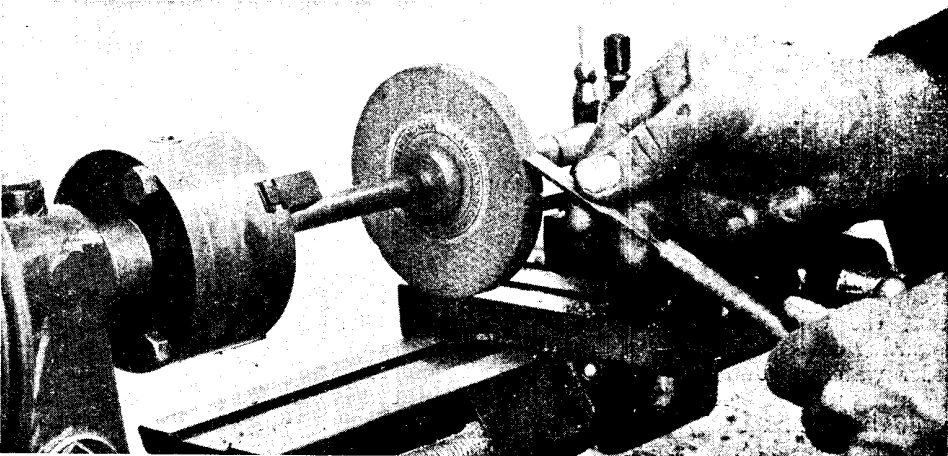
This photograph shows how a grinding wheel is mounted on a mandrel and driven on a lathe. In this case a scraper for metal-fitting purposes is being ground
